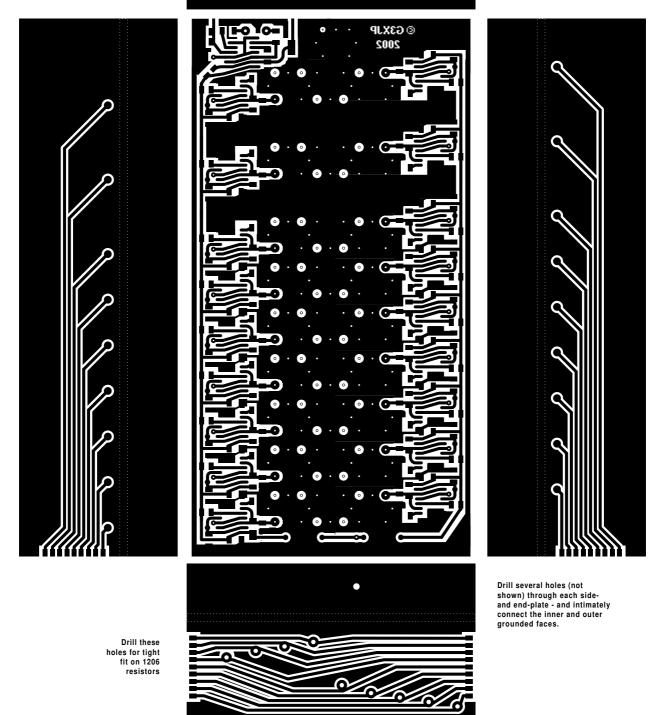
Band-pass filters PCB layout for 9 filter blocks. This assembles into an H-section brick (for the want of a better term). The filter board is single-sided - and SRBP if you want to save on drill bits; the side and end-plates are double-sided. Ensure opposite sides of all the double-sided boards are intimately connected. The outside faces of both end-plates have simple oval pads to make off the feedthrough resistors to the band-select lines at one end - and the 12VTx and Rx lines at the other. The artwork for this is not provided since some elementary removal of the masking spray after drilling and prior to etching will achieve the desired and non-critical result.
